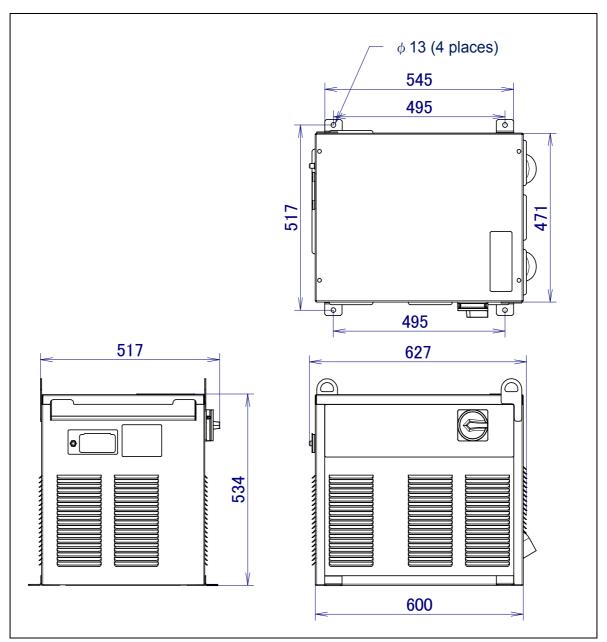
(a) Welding power supply of ROBOWELD iC/H (Power Wave i400)
